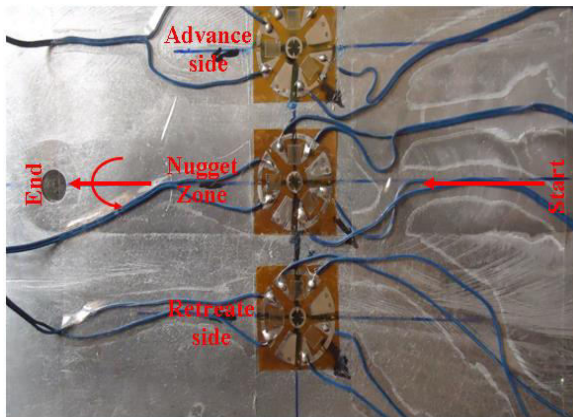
Strain-gauge rosette installation on the welding specimen.
